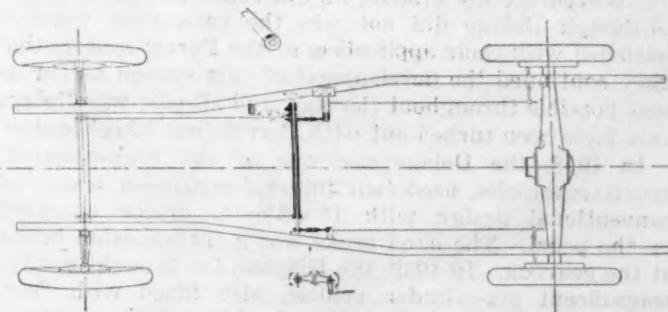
THE PERROT SYSTEM OF DIAGONAL FOUR-WHEEL BRAKING
